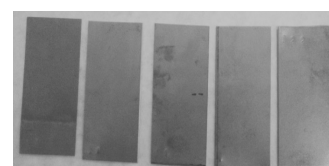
Rectangular profile of deep-drawn sheet KOSMALT 190
